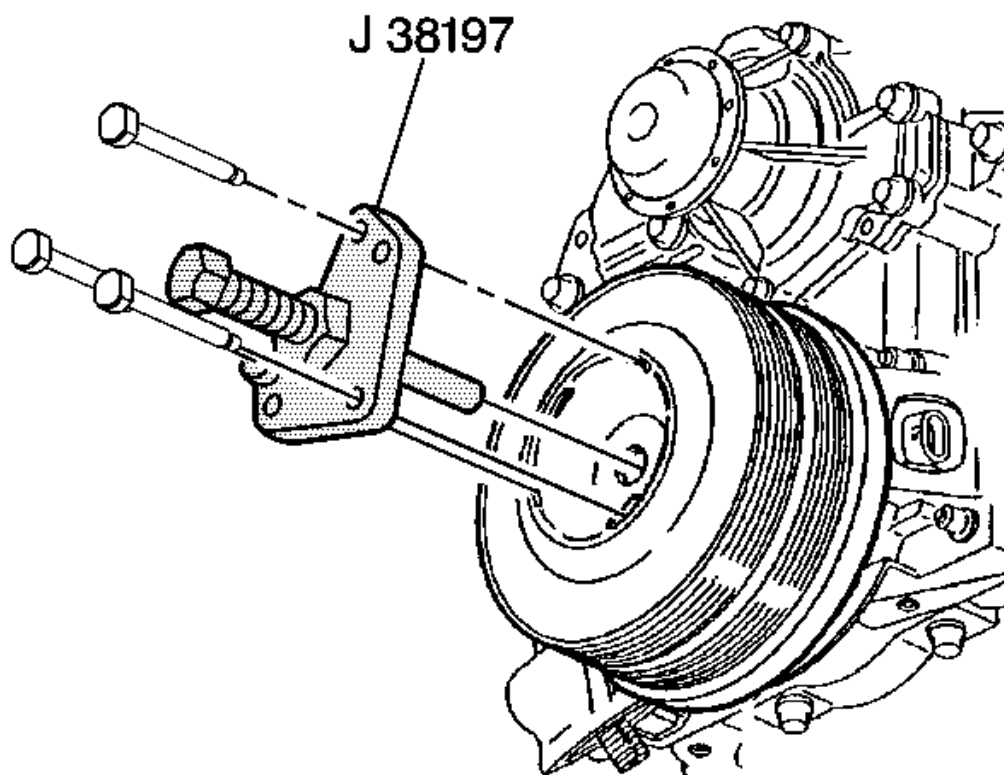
Removing The Crankshaft Balancer J 38197-A
